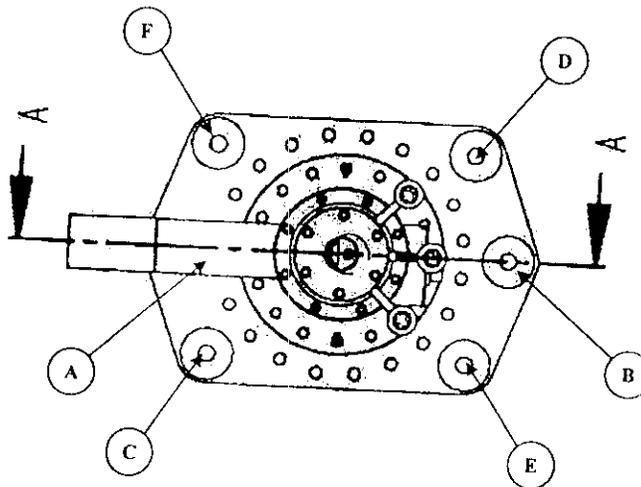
The specified sequence for tightening the Belleville washer assemblies.
